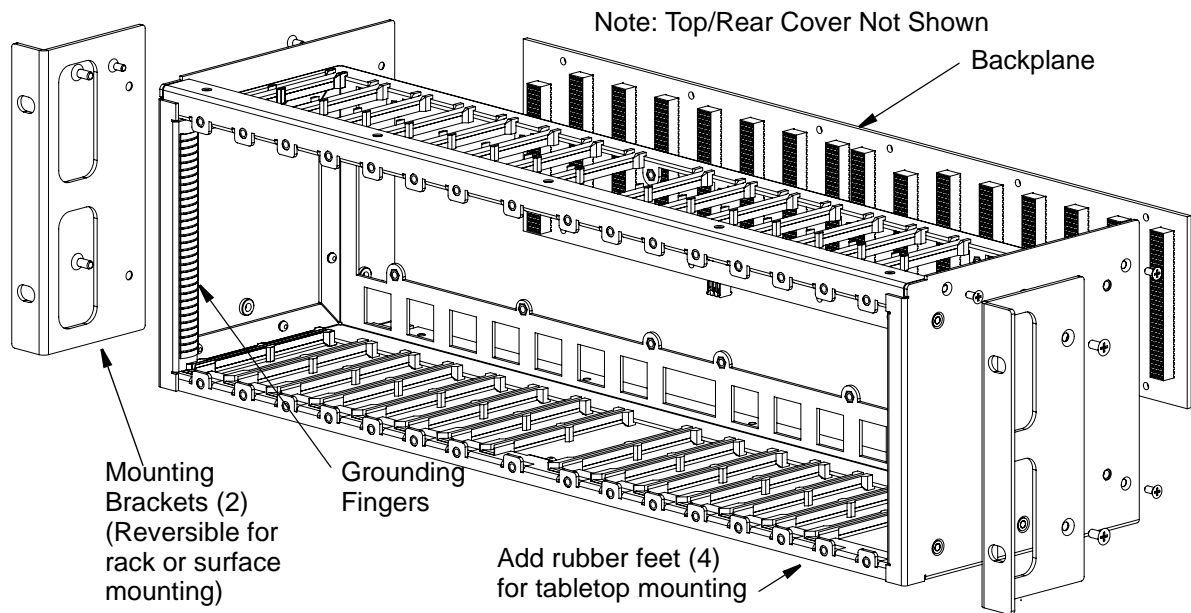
Typical PowerDNR DNR-12 Enclosure (Exploded View)
